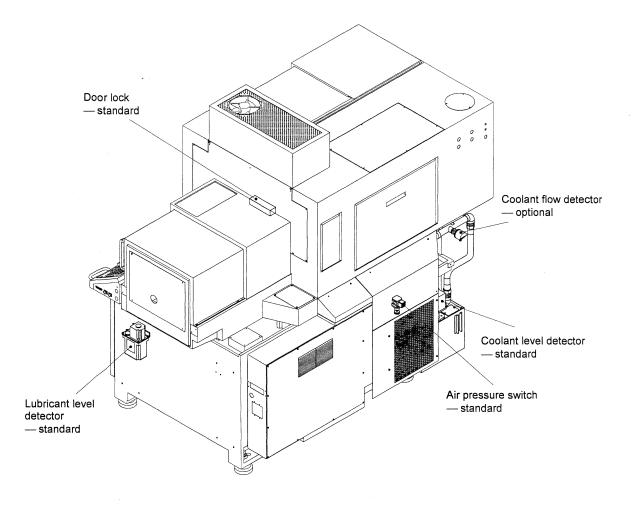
Locations of the safety devices (rear view of the machine)
